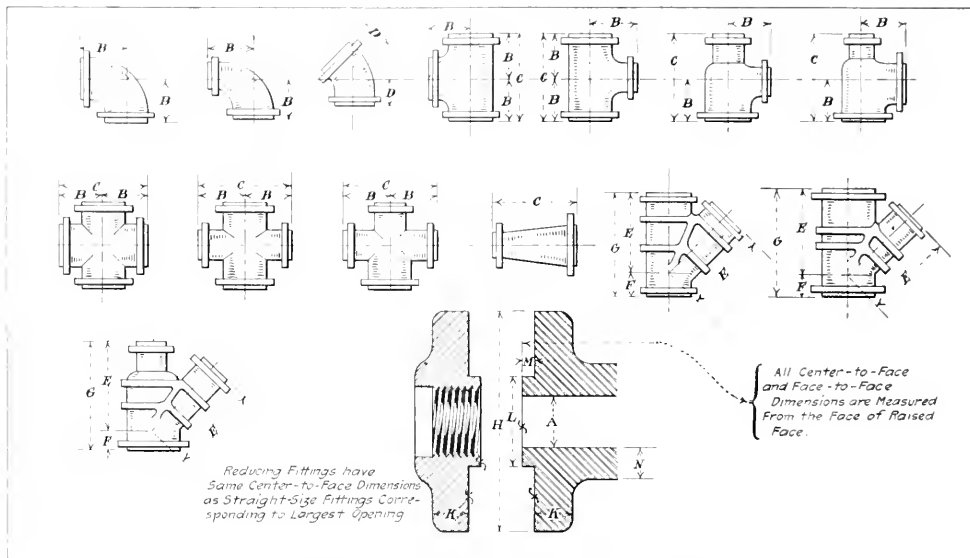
HYDRAULIC AMERICAN STANDARD FLANGES AND FLANGED FITTINGS DIMENSIONED IN TABLES 2, 3 AND 4
